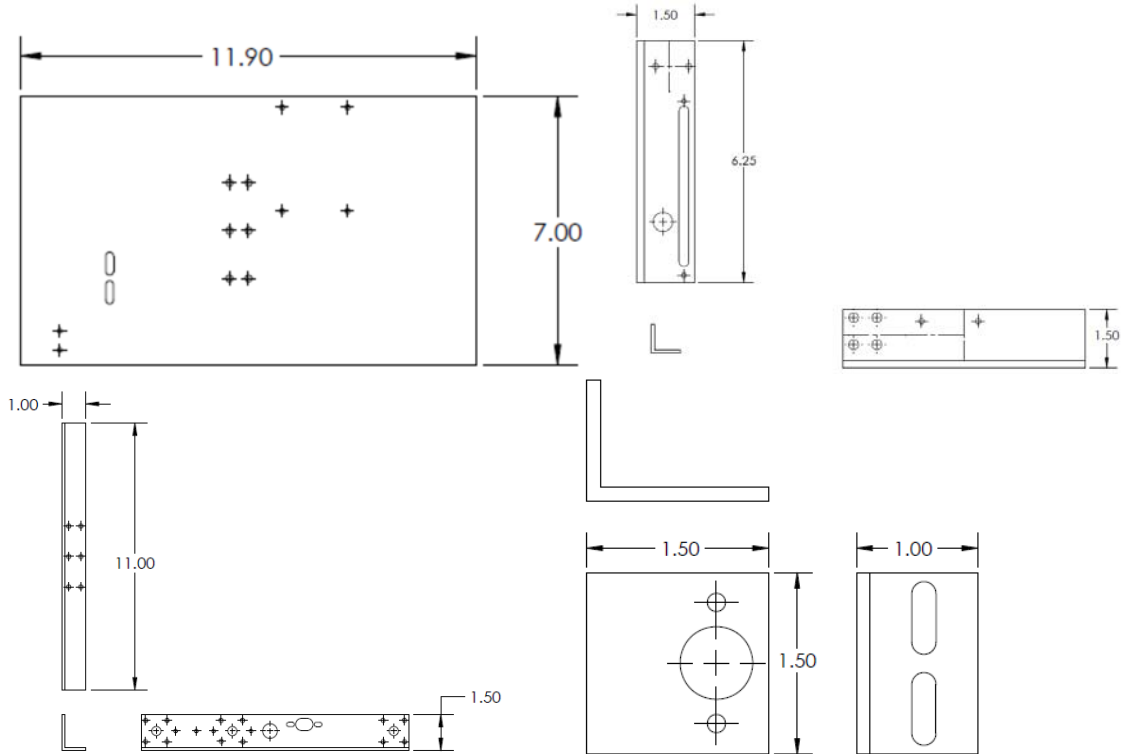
Partial drawings of the four machined parts. Top left: Aluminum base plate (1/16" thick), Bottom left: three views of aluminum L-bracket (1/8" thick); Top right: sensor mount (1/4" thick); Bottom right: optional tachogenerator mount. (1/8" thick). Dimensions in inches.
